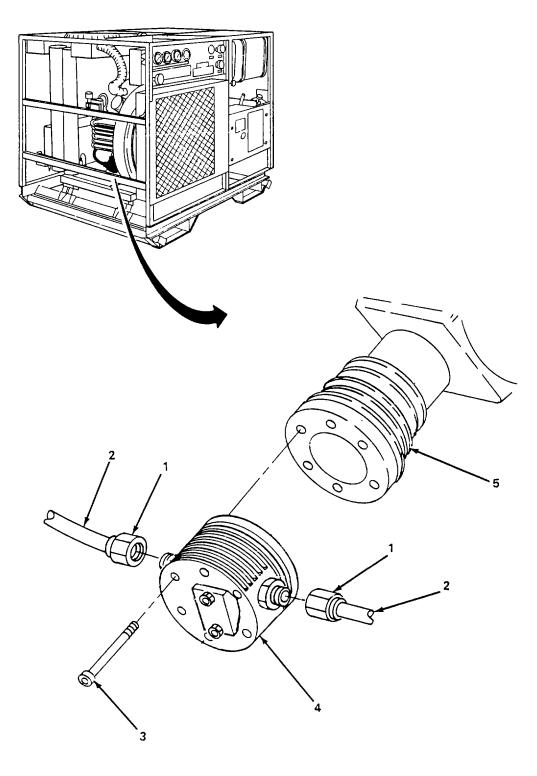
2nd and 3rd Stage Valve Head Assembly, Replace.
